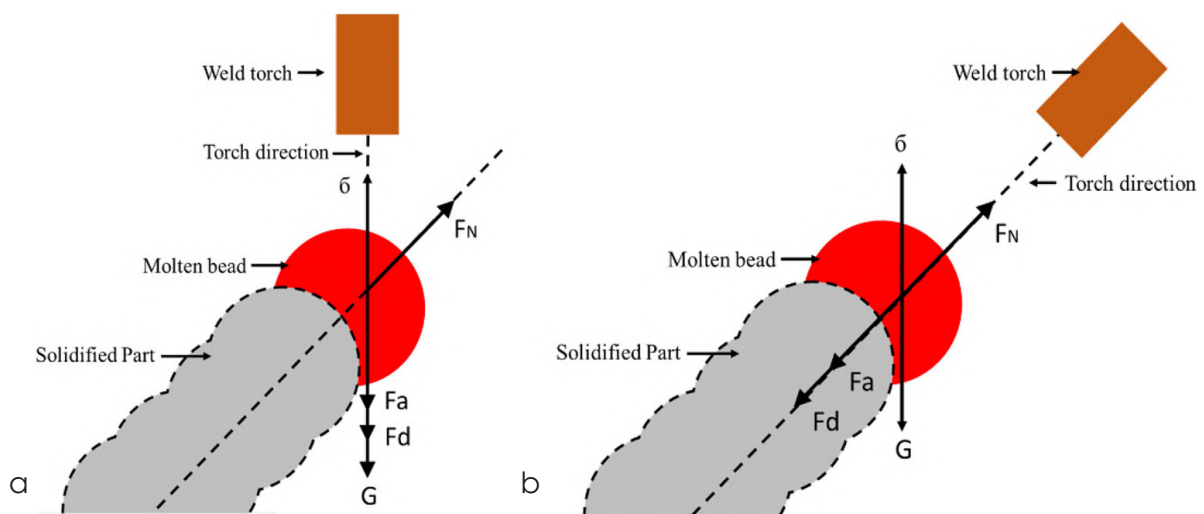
The force model of the weld bead of a thin walled part [3.6]
